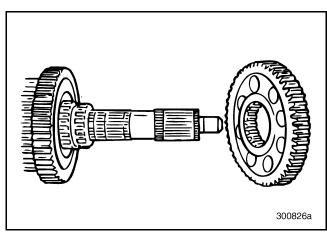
Installing Reverse Speed Gear onto Mainshaft (T313L/T318L Shown)
